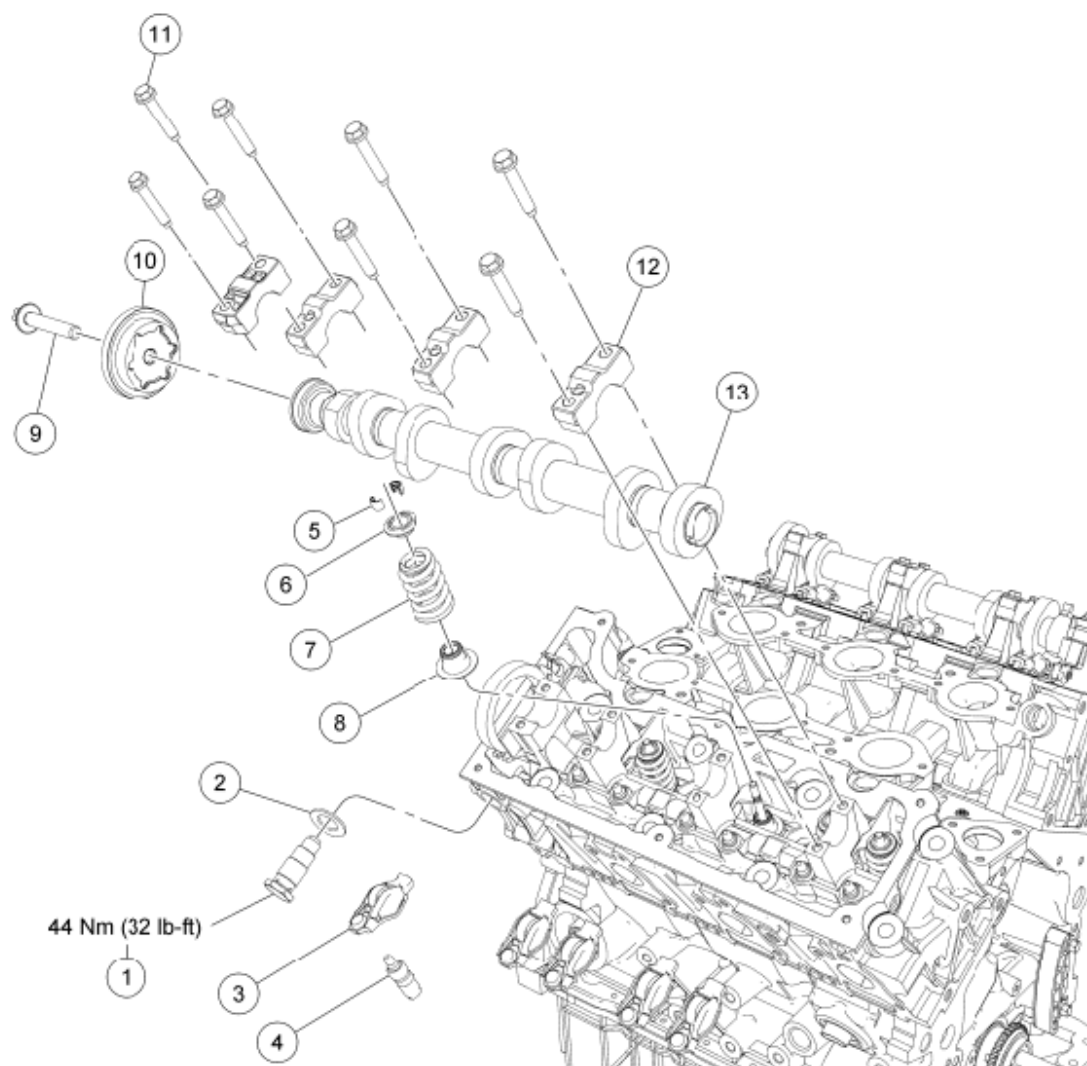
Identifying RH Valve Train Components With Torque Specifications
